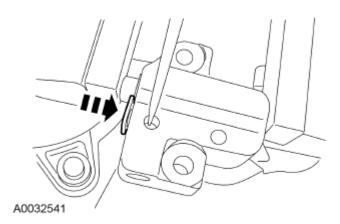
Pushing Ratchet Arm Back Into Tensioner Housing
